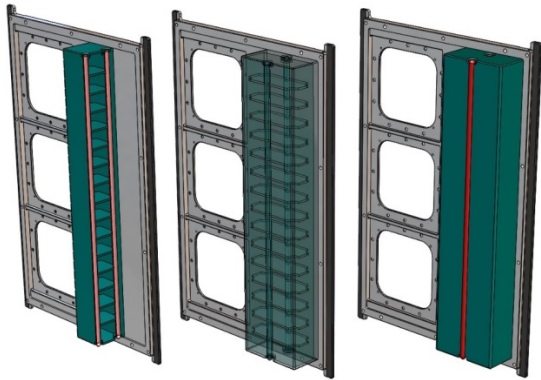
3U length PCM accumulator, full view (right), transparent view (center), and cut out view (left)
